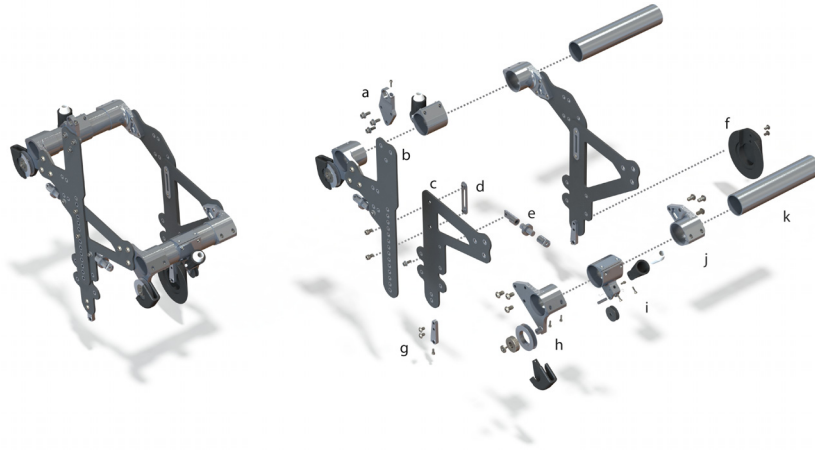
Thigh segment of the exoskeleton. Assembled (left) and exploded (right) views of the thigh segment of the exoskeleton. (a) Hip joint assembly. (b) Upper thigh strut. (c) Lower thigh strut. (d) Threaded inserts. (e) Hip load cell assembly. (f) SLS nylon joint cover. (g) Knee joint assembly. (h) Lateral clamp and hip pulley assembly. (i) Knee pulley and clamp assembly. (j) Medial clamp assembly. (K) Thigh crossbars.
